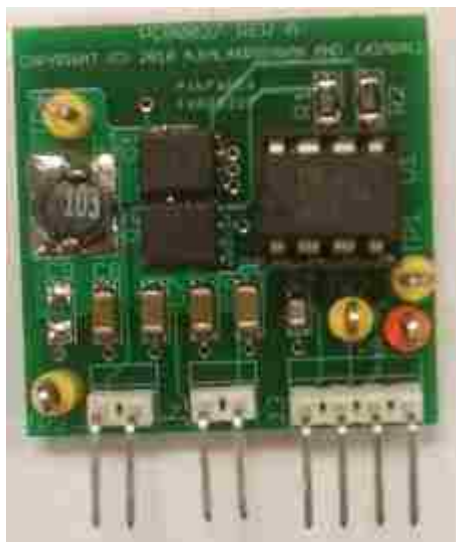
Synchronous Buck Converter Power Stage PCB (PCB0027)
